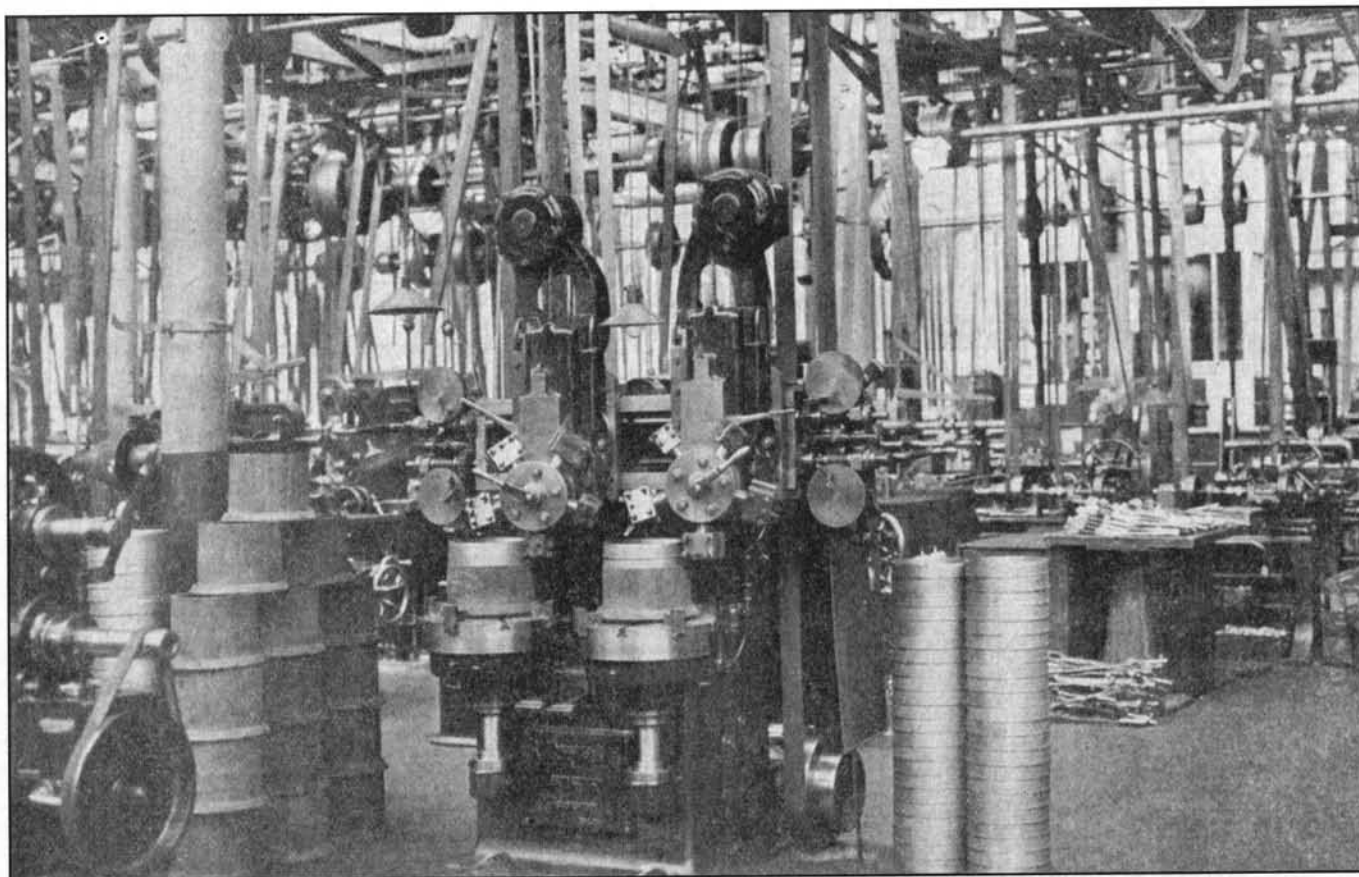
A. A view in a typical machine-tool shop. In the foreground is seen a Duplex Mill producing brake drums from castings long enough to cut several.
